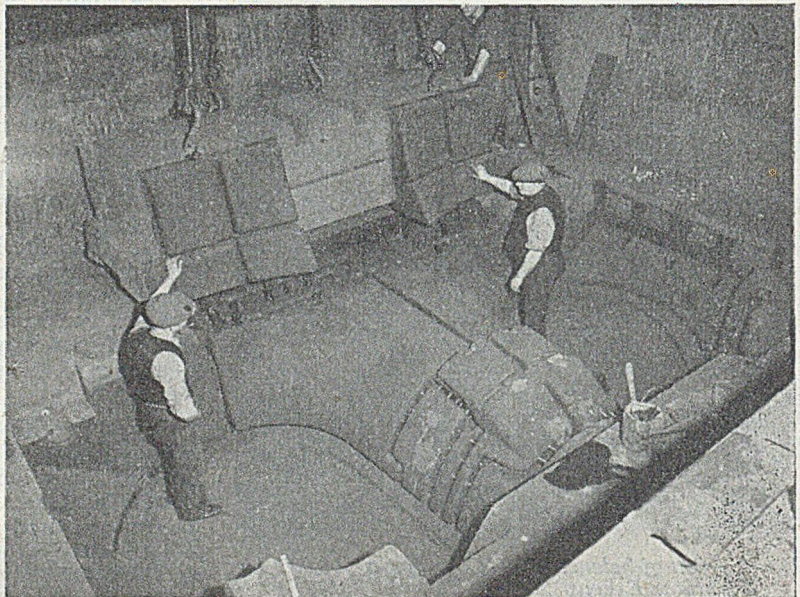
Large Drawback being placed in a Mould for a 100,000 kw. Turbine Exhaust Section.
